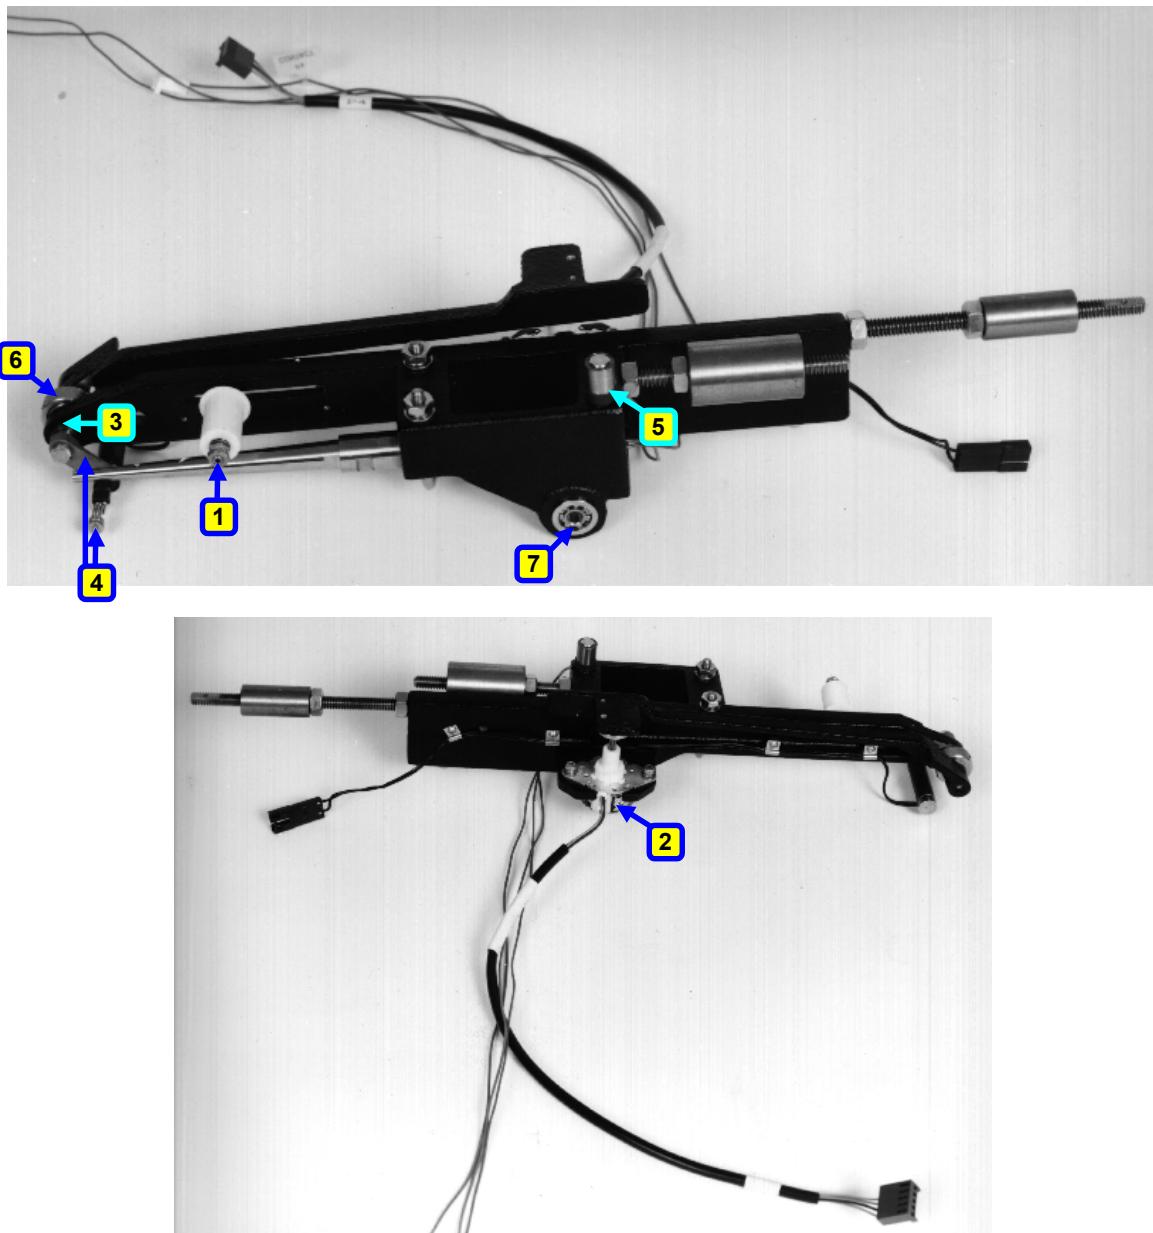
Bonding Head - Models 4523D, 4523AD
